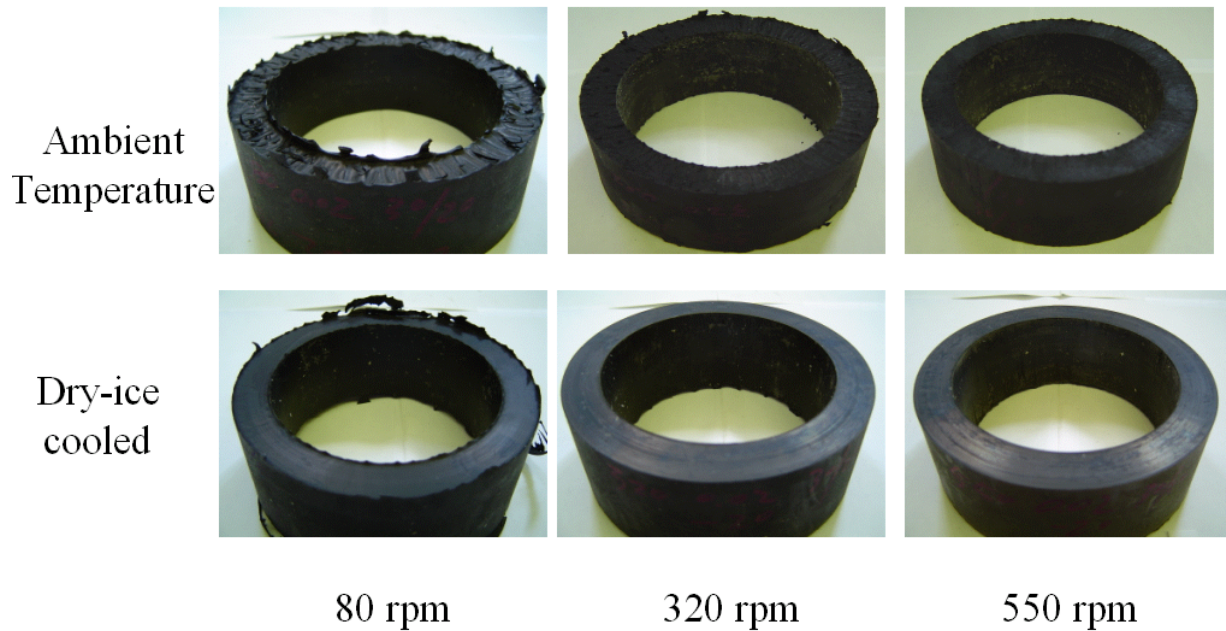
Photos of machined surface roughness with workpiece temperature.
